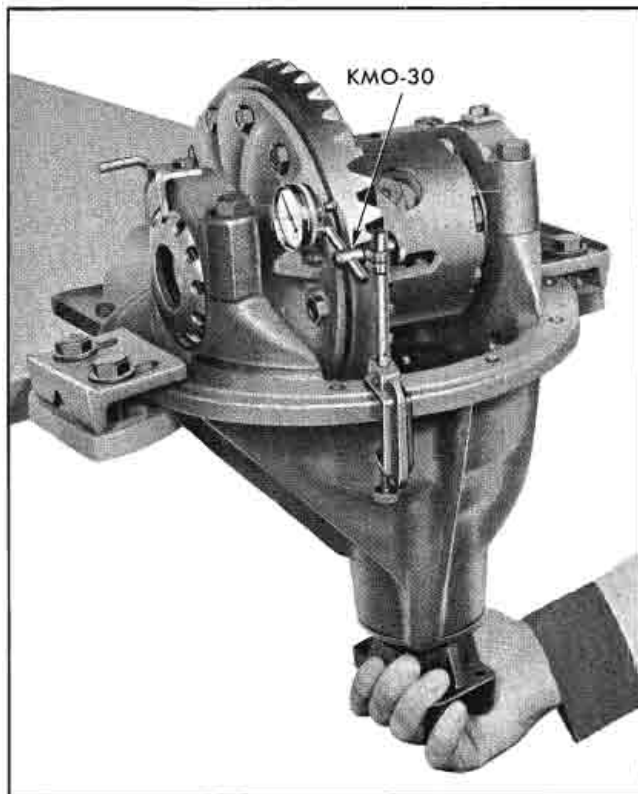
Checking Ring Gear Run-out with KMO-30 Set
